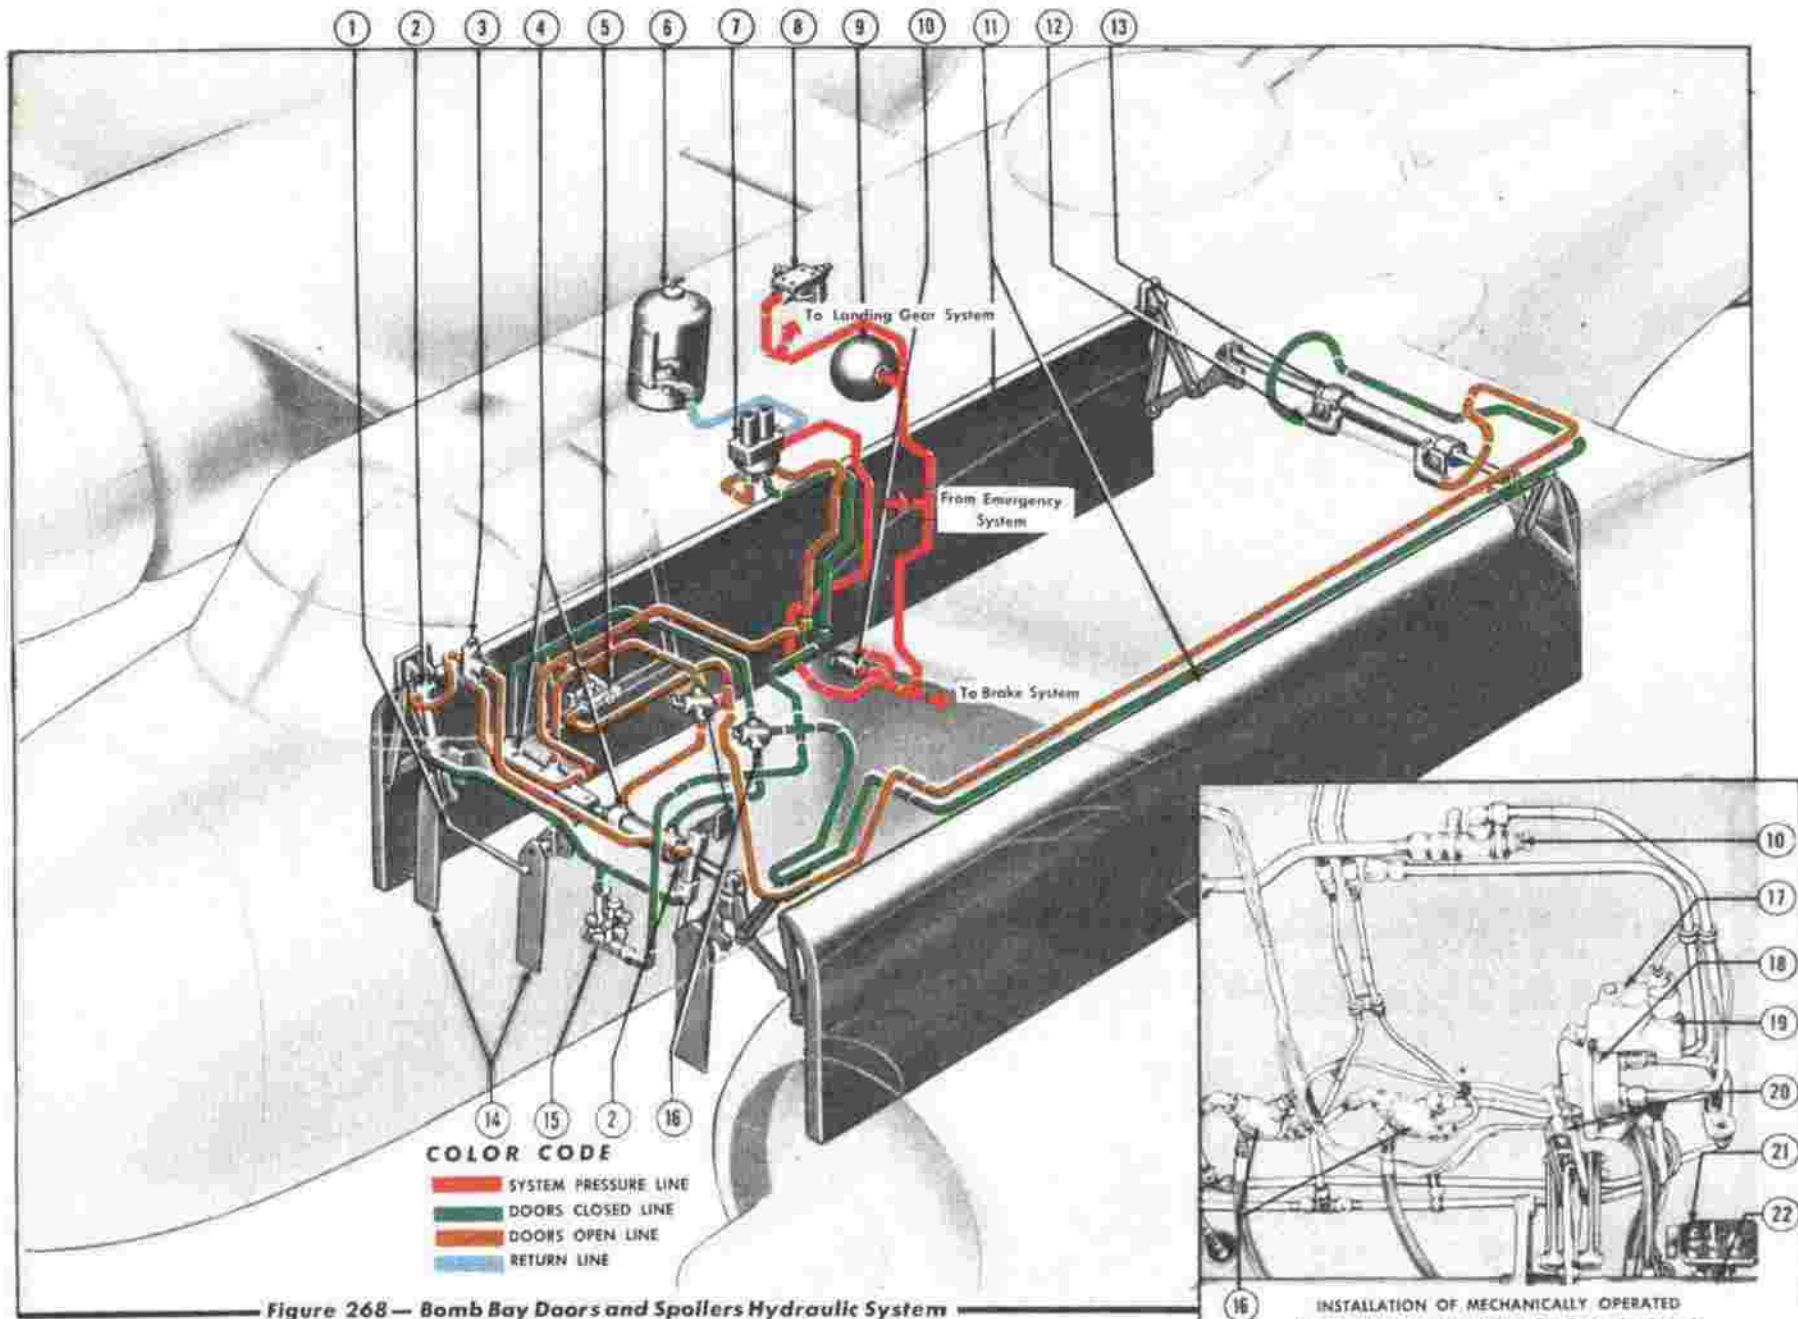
Bomb Bay Doors and Spoilers Hydraulic System
